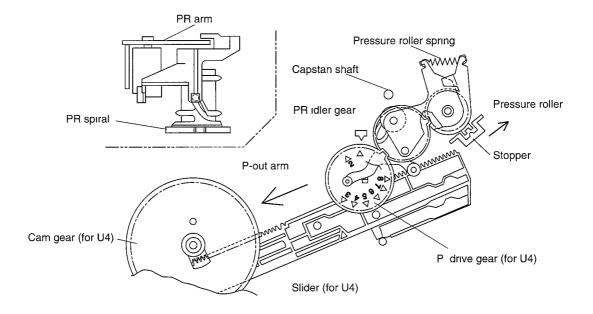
Pressure Roller Drive Mechanism (Top View)
